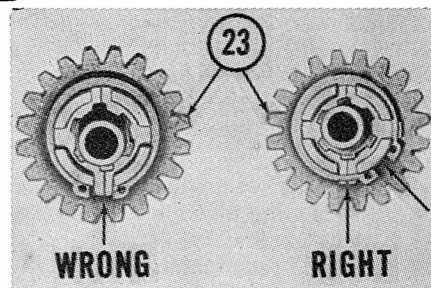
View of fourth gear positioning pieces and snap ring (3—Fig. S10-10) assembled. Split in positioning pieces and opening in snap ring should not be aligned.
